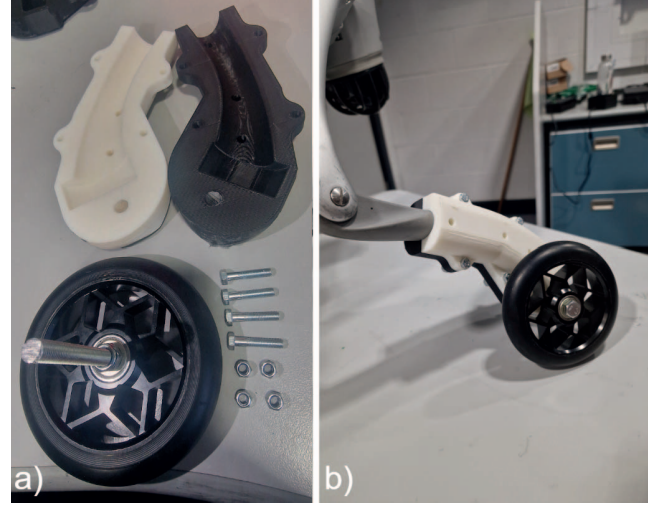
a) Disassembled skate, including the 3D printed moulds. b) The skate assembly on the FR leg of the Go2 (The foot needs to be removed before clamping the moulds).
